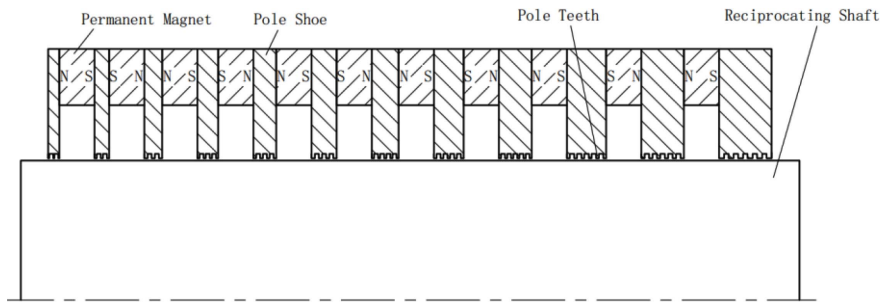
Two dimensional plane symmetry model of reciprocating sealing structure with magnetic fluid.
